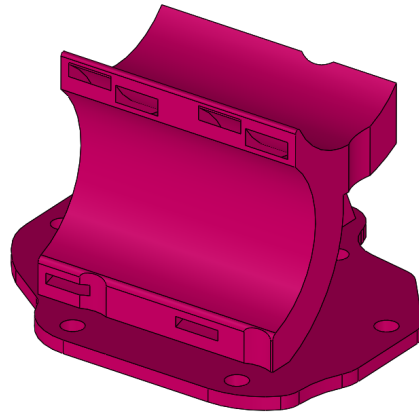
Air bottle mount SolidWorks part model with hose clamp fitting
